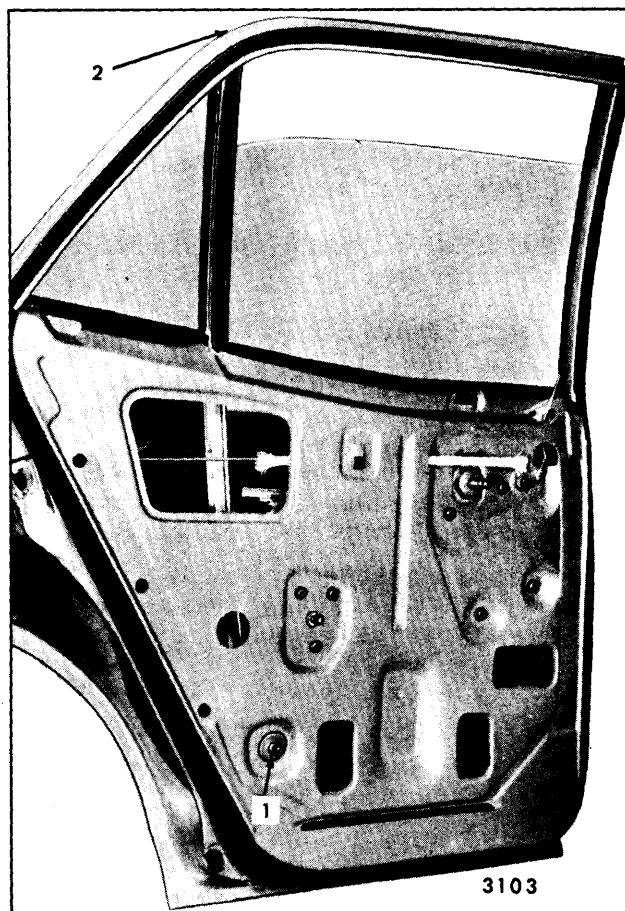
Rear Door Window Removal and Adjustments - "X-69" Styles
